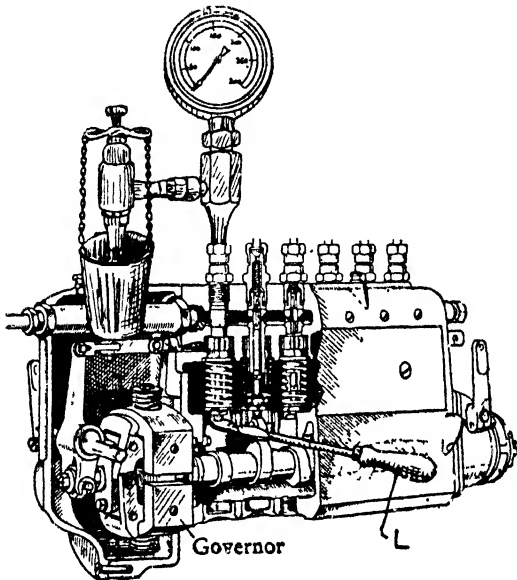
Equipment for Testing Fuel Pump Operation and Nozzle Discharge.
